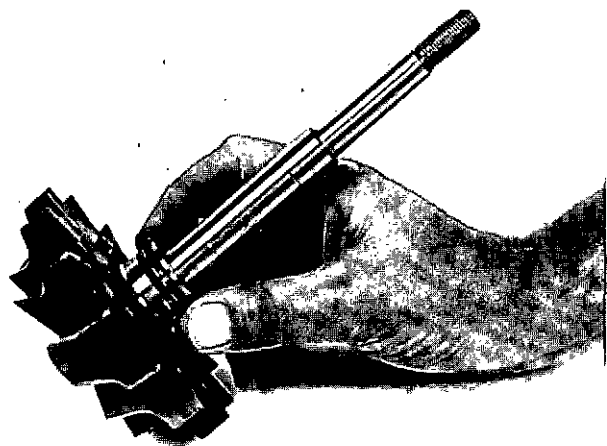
, (T465085). Install the sealing rings onto the turbine wheel and shaft
